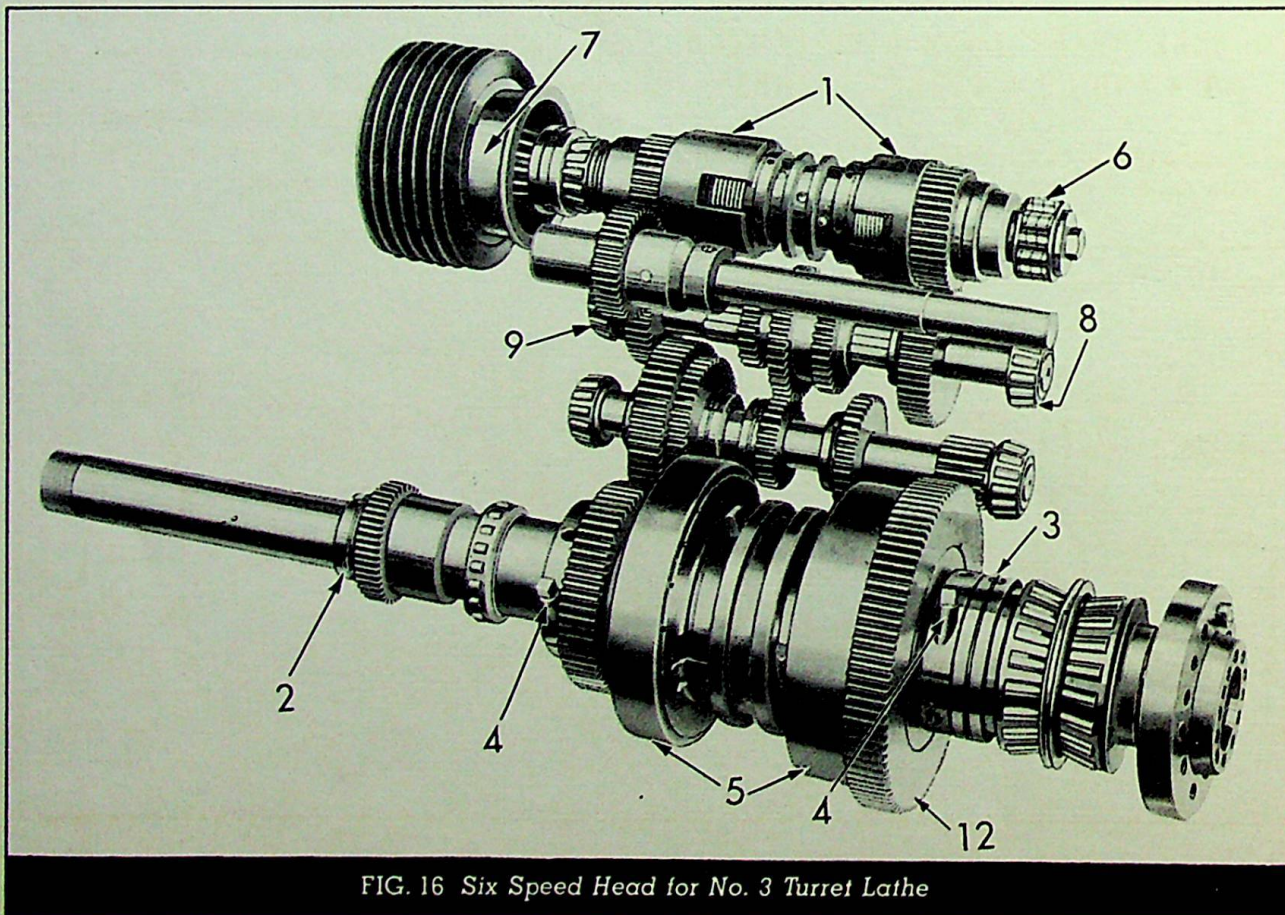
Six Speed Head for No. 3 Turret Lathe
